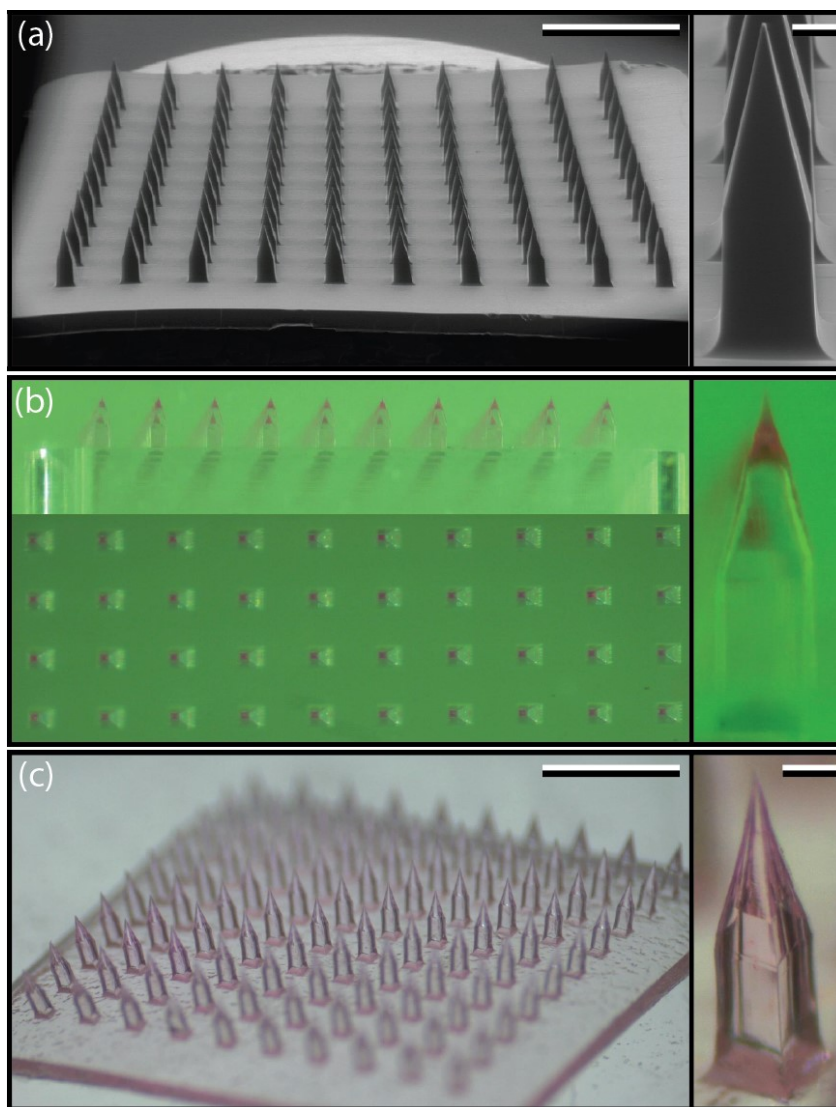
Description of the micromilling/spin-casting based fabrication approach used for creating tip-loaded dissolvable microneedle arrays. Three-steps: (a) Mechanical micromilling of mastermolds. (b) Elastomer molding of production molds. (c) Spin-casting to localize anti-TNF- α in the apex of obelisk microneedles and fabricate tip-loaded dissolvable MNAs.
